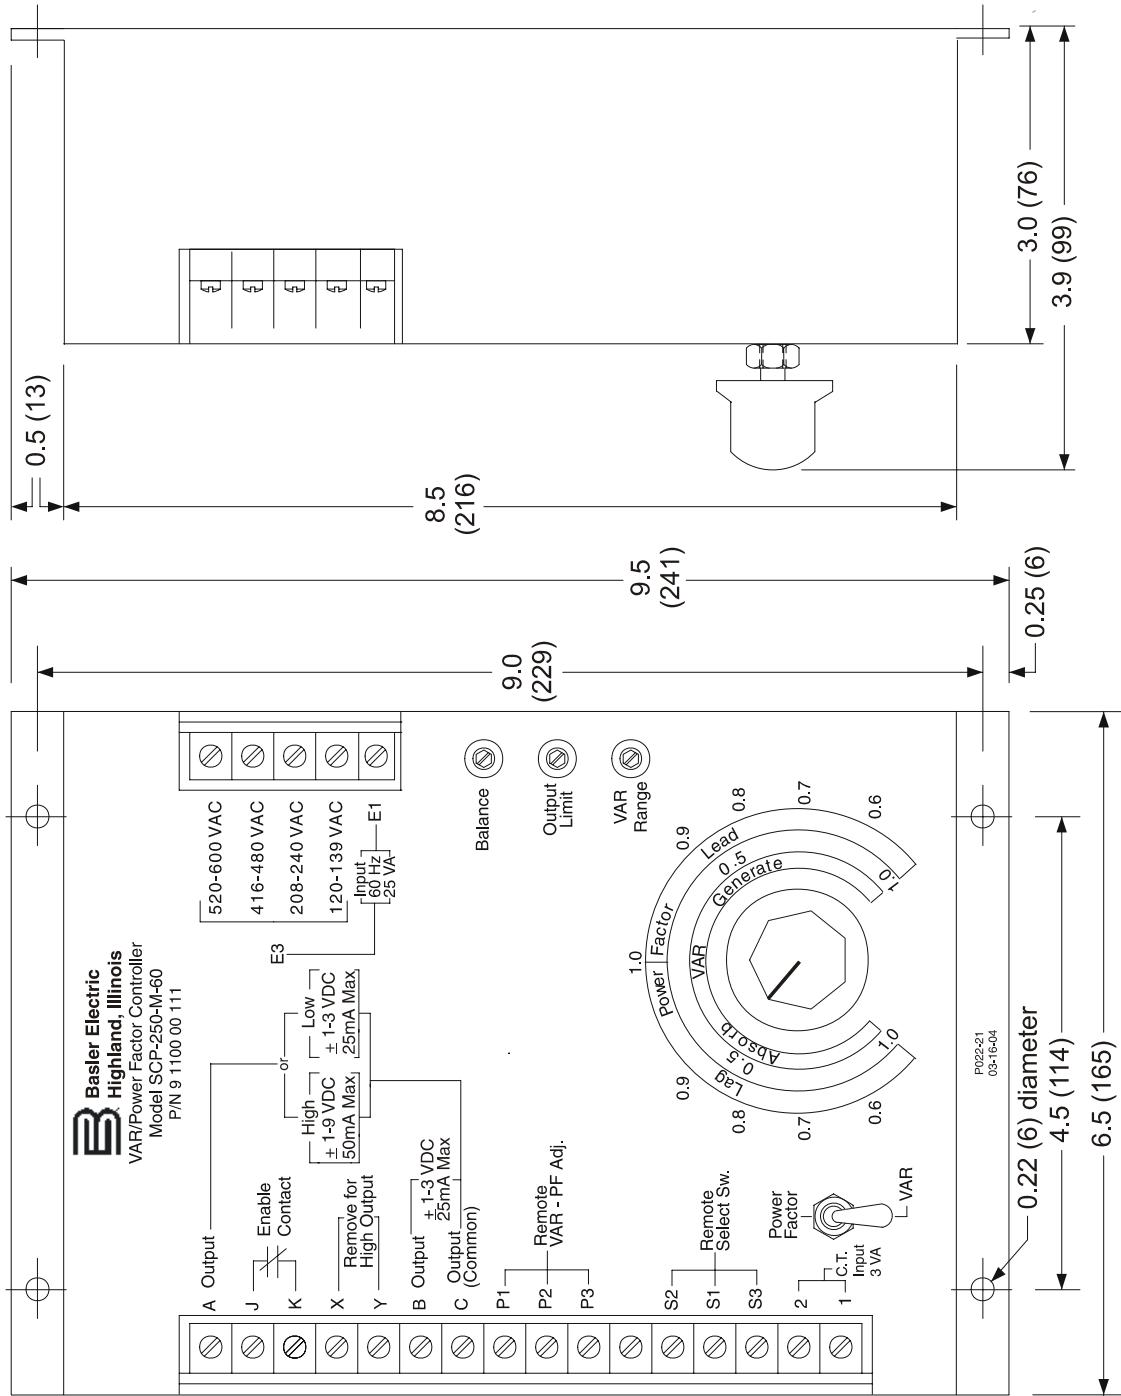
SCP 250 Outline and Drilling Dimensions
